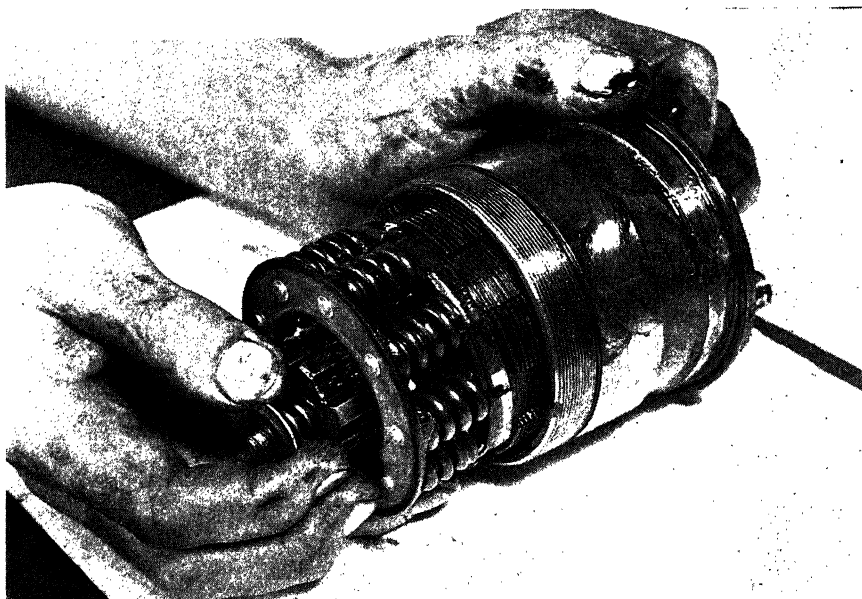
REMOVING CLUTCH PLATES FROM BARREL
